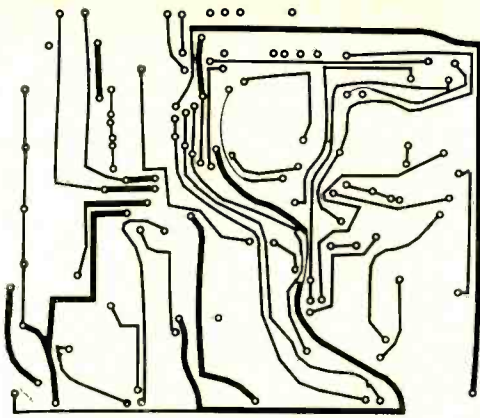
FOIL PATTERN of component-side of PC board. Actual board measures 5 x 4 1/4-inches.
